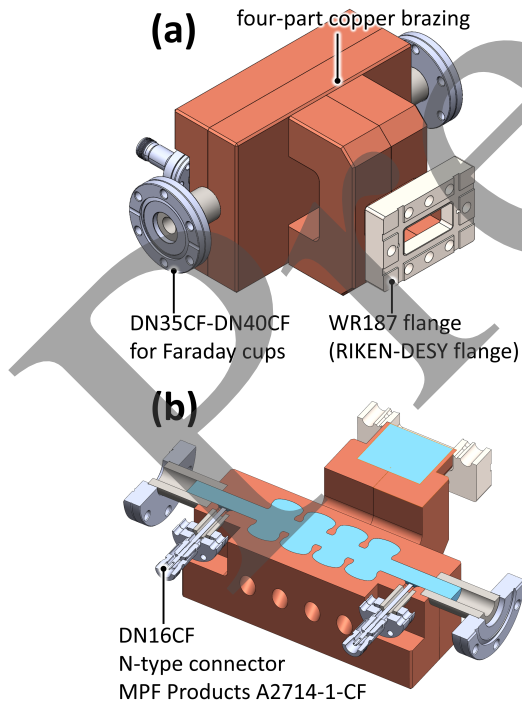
Mechanical design overview of the four-cell cavity, showing (a) the cavity as a brazed body of four major copper components, and (b) the half-section view illustrating the field probes.
